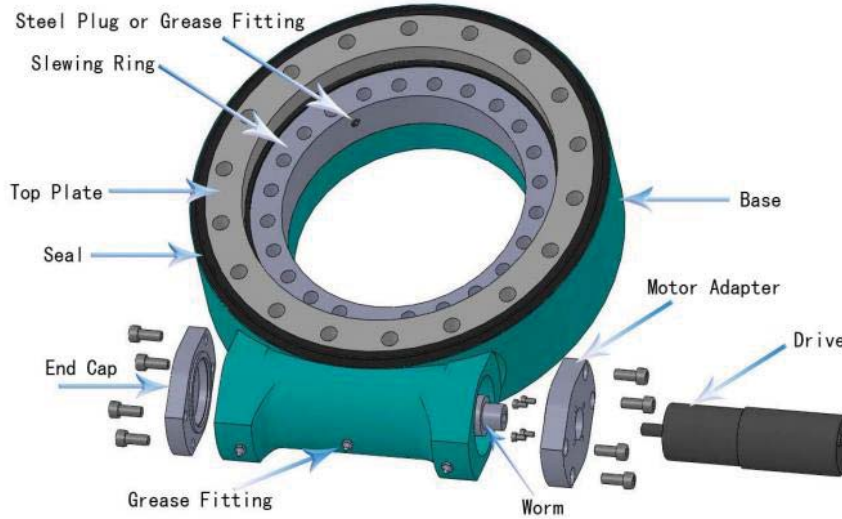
Illustration of the slewing actuator mechanism with DC motor drive assembly to show the slewing drive components (Fang, 2013).
